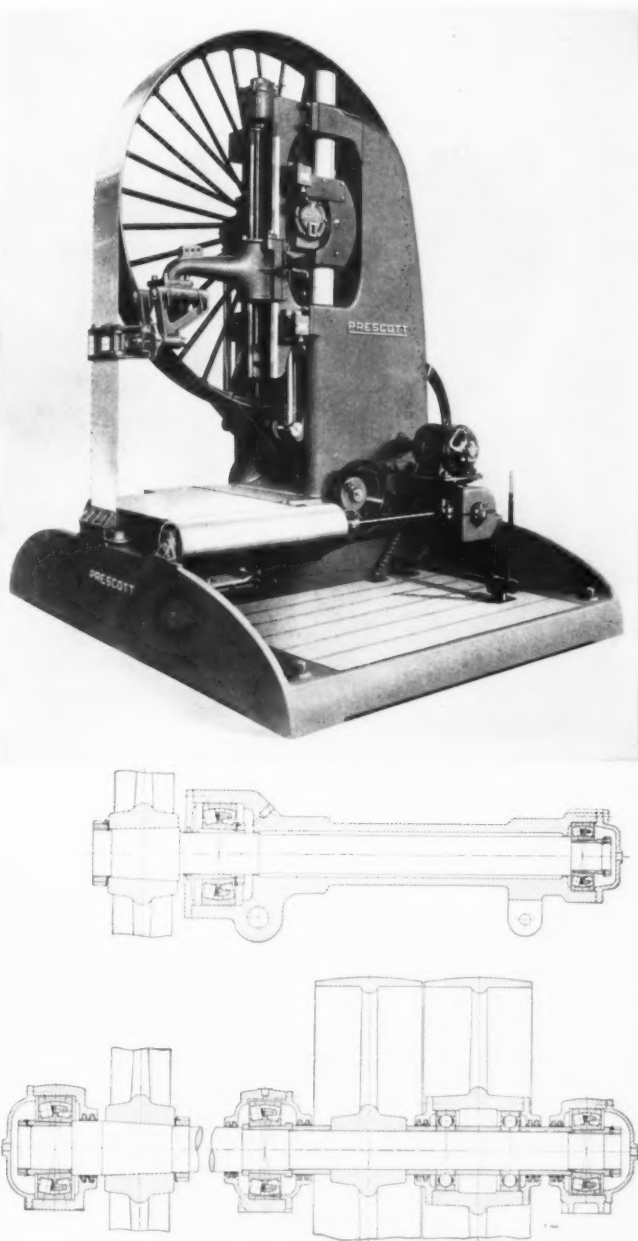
A Prescott handmill equipped with SKF bearings. Speeds up to 10,000 feet per minute are developed. Note below typical details of SKF ball and roller bearings as applied to bandsaw construction.
